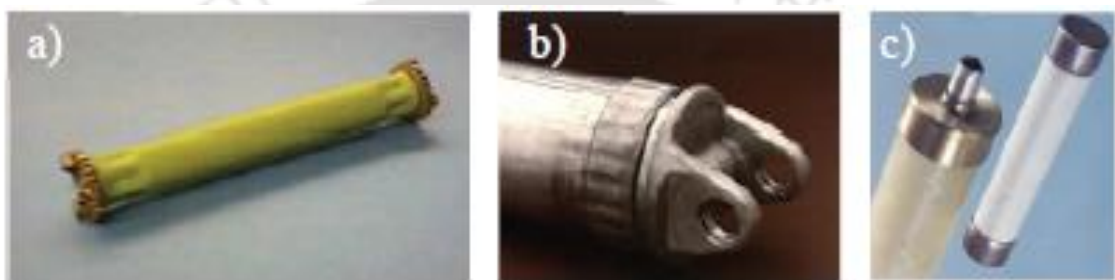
Sample assemblies joined by electromagnetic welding a) Boeing 777 torque tube, b) 4" drive shaft, for Ford, and c) high voltage fuse [31]
